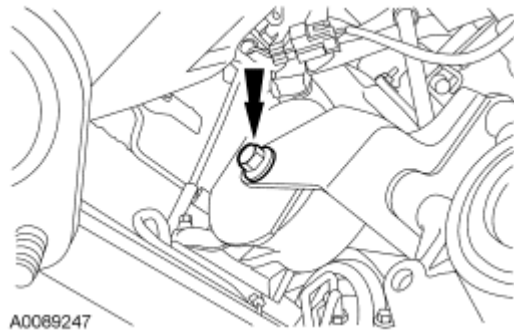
Locating RH Transaxle Support Insulator Bolt
